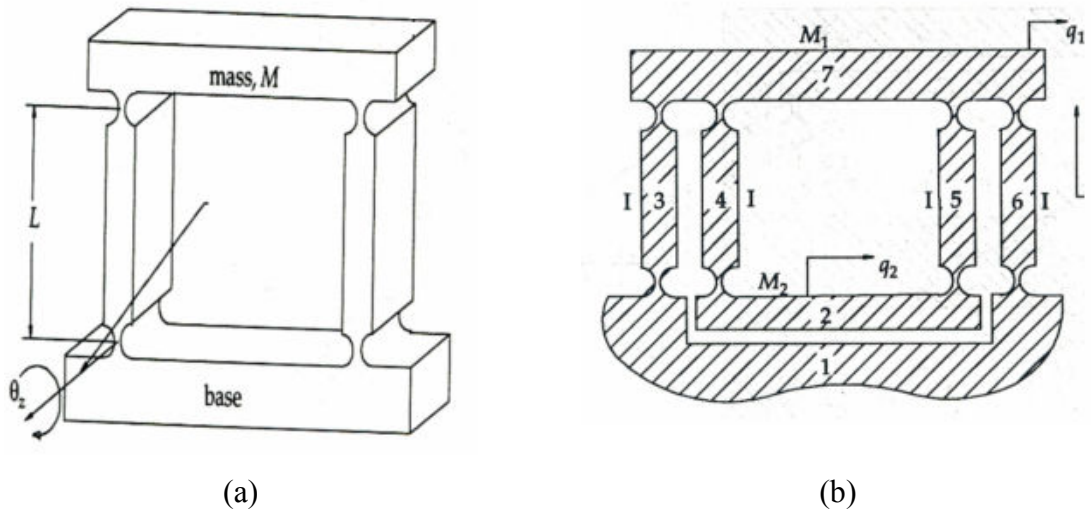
(a) Simple Notch Type Spring Mechanism, (b) Notch Type Compound Spring Mechanism [5]
